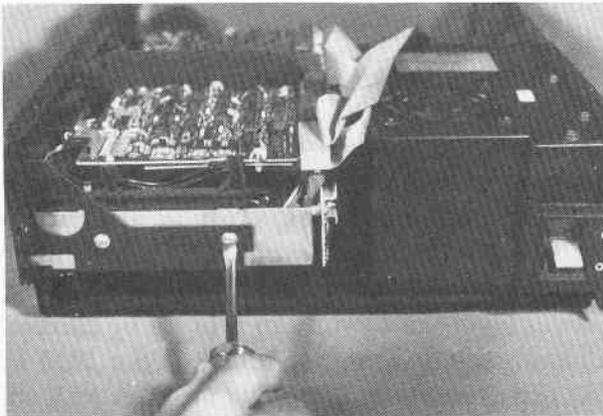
Remove the two flathead screws holding the disk drive to the chassis.
